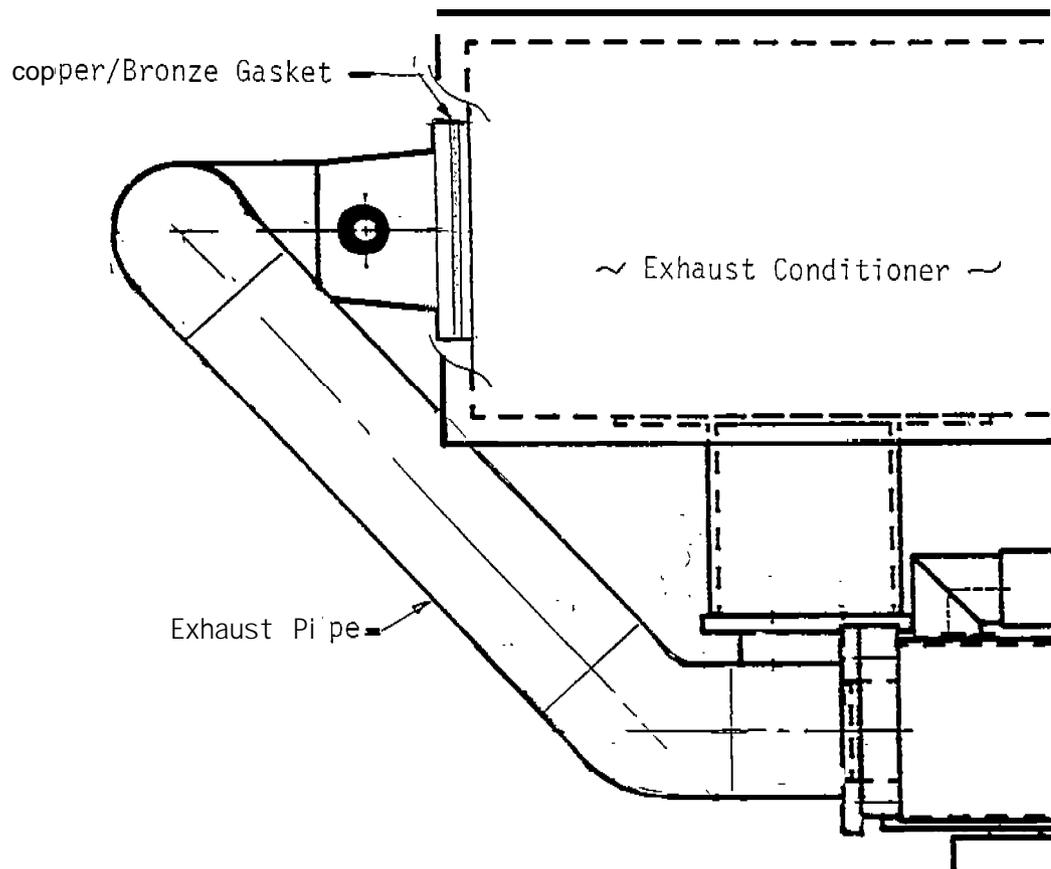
Gasket Between Exhaust Pipe and the Flange of the Exhaust Conditioner
